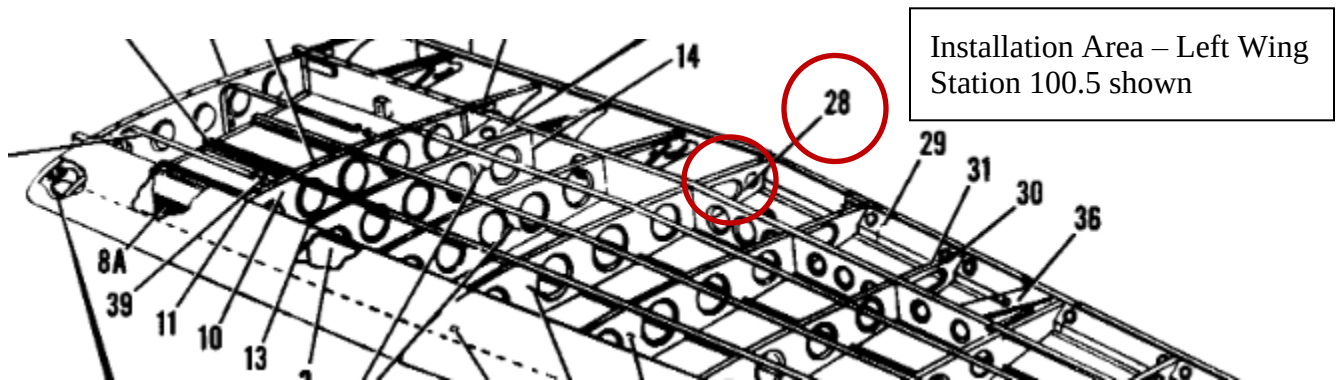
WS 100.5 SERVO MOUNT RIB LOCATION
